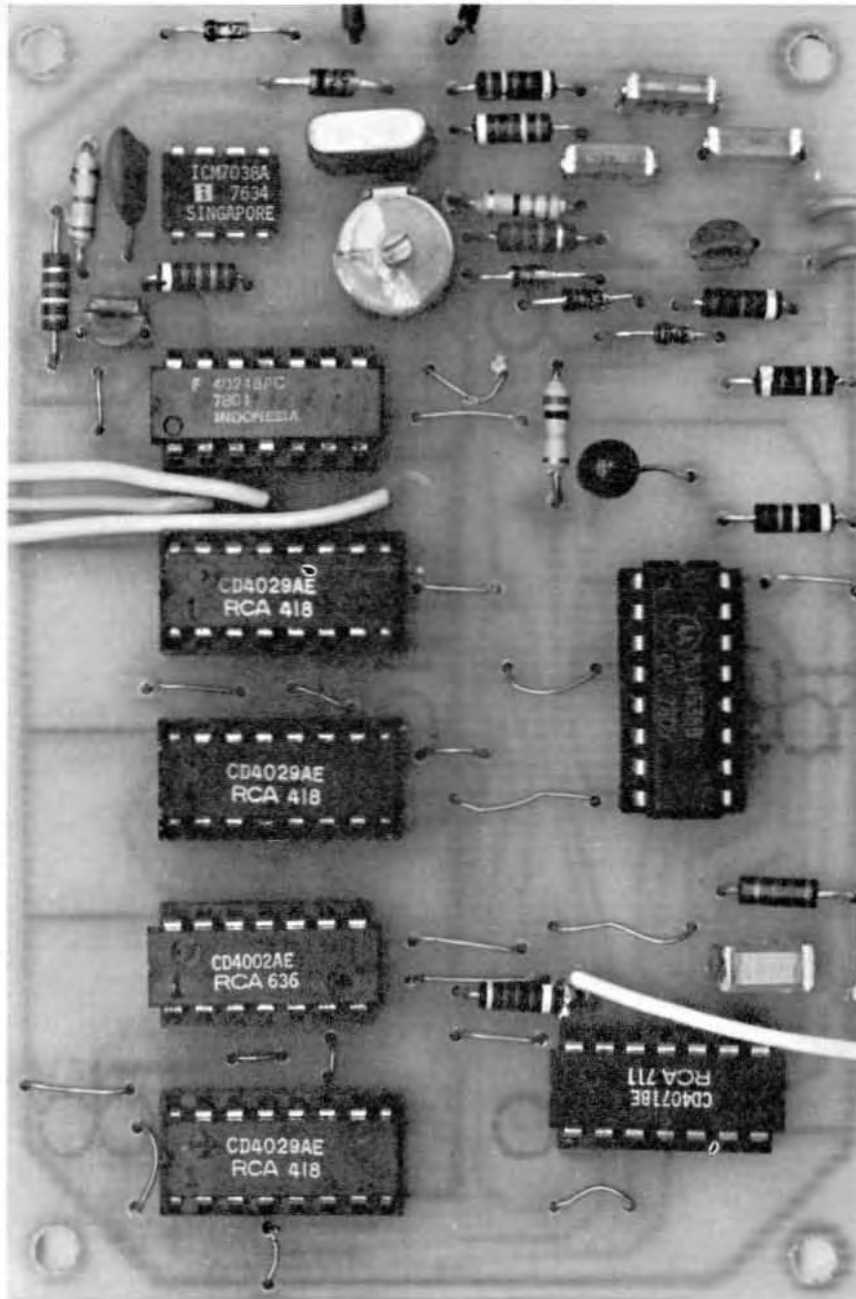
Enlarged photograph showing placement of components on the printed circuit board.
